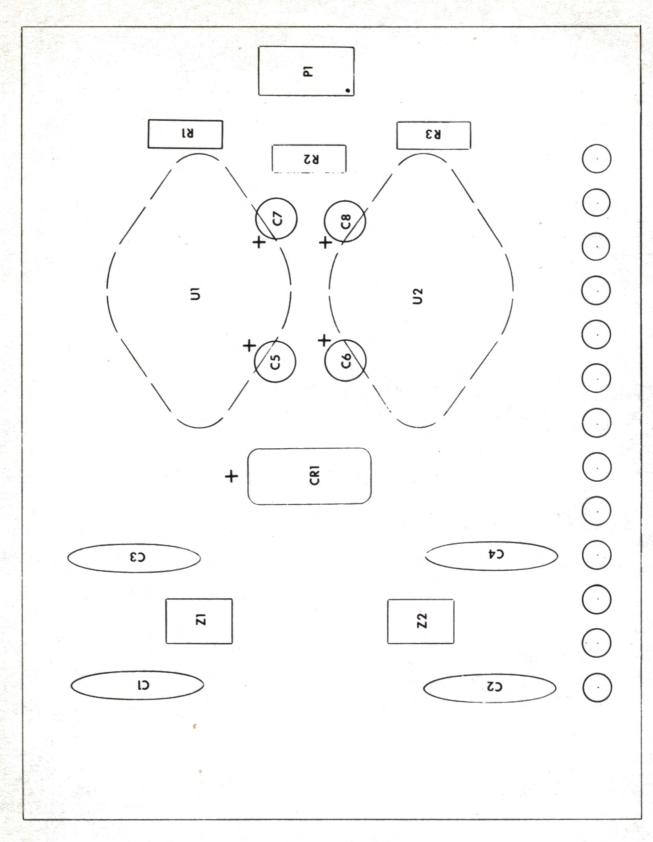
(SHEET 2 OF 2) POWER SUPPLY COMPONENT LOCATION - 843 2212 001
